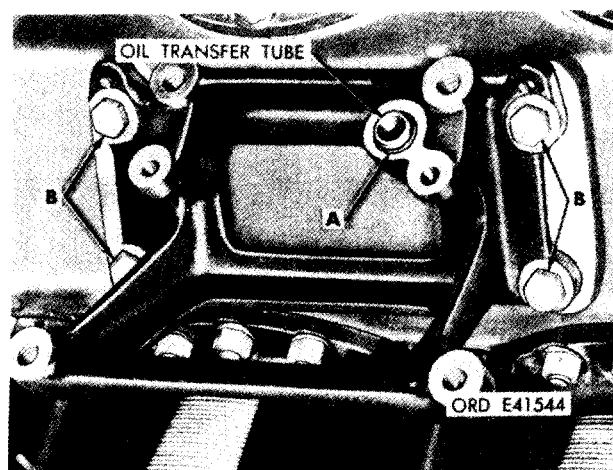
Location of preformed packing at oil transfer boss in crankcase assembly.
